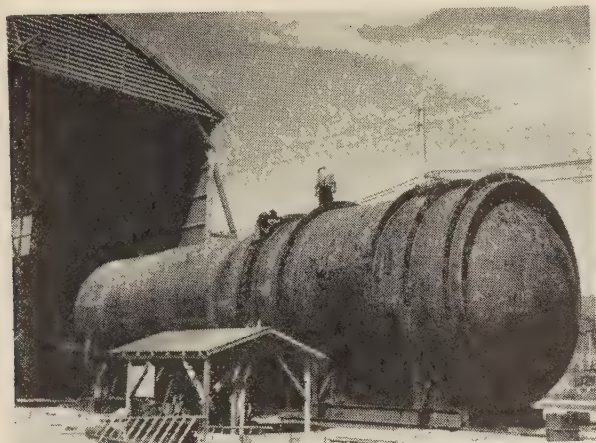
TESTING MACHINE FOR MAIN-UNIT PENSTOCKS
